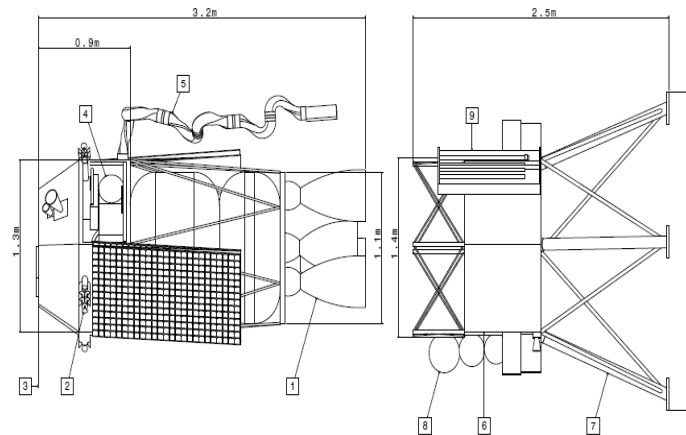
Exploded view of lander with dimensions with left the ascent stage and right the descent stage
